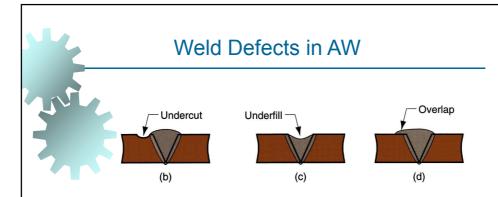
Same joint but with several weld defects: (b) *undercut*, in which a portion of the base metal part is melted away; (c) *underfill*, a depression in the weld below the level of the adjacent base metal surface; and (d) *overlap*, in which the weld metal spills beyond the joint onto the surface of the base part but no fusion occurs.
